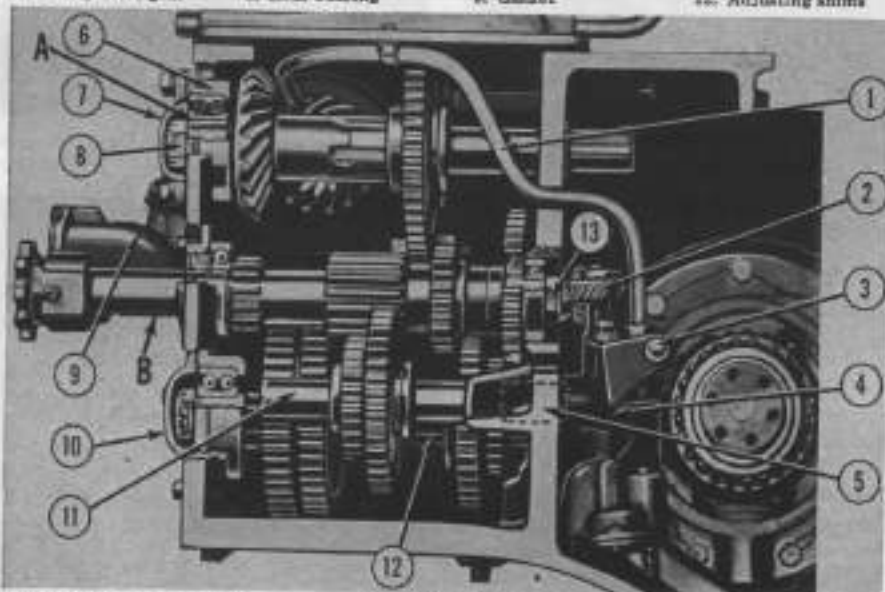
Transmission cross-section—Models 101, 101 Jr., 101SR., 101 Super, 102JR., 102SR., 102G. JR. and 102G. SR.
